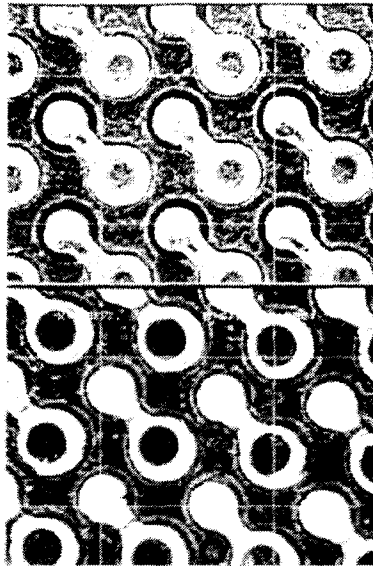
Solder mask, sufficient (top) and insufficient (bottom)
